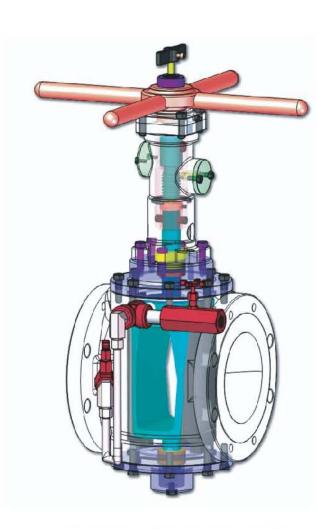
DBB DOUBLE BLOCK & BLEED PLUG VALVES
